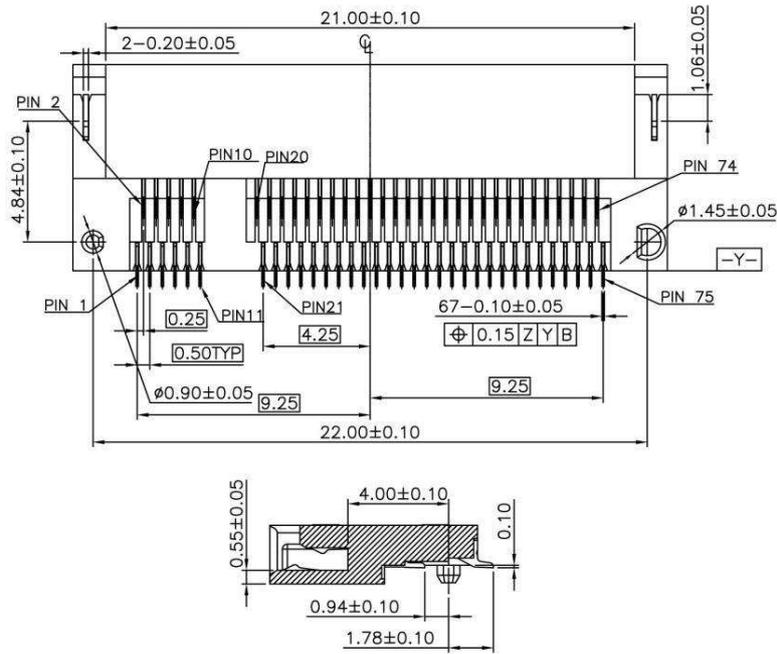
M.2 Dimensions of structure for stack-up Mid-mount single-sided module
